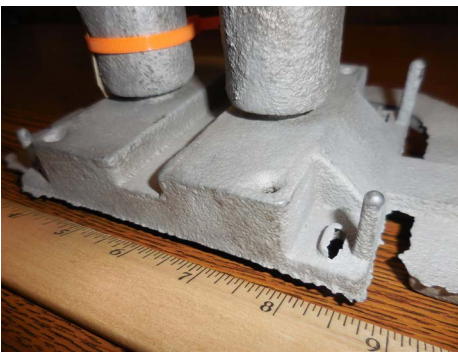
Cast Aluminum A356 Part Using a 3-D Printed Mold With Mojave Desert Sand. Note What Appears to Be a Rougher Surface Compared to the Part Made With the OEM Sand (Figure 14) (Source: ARL).
